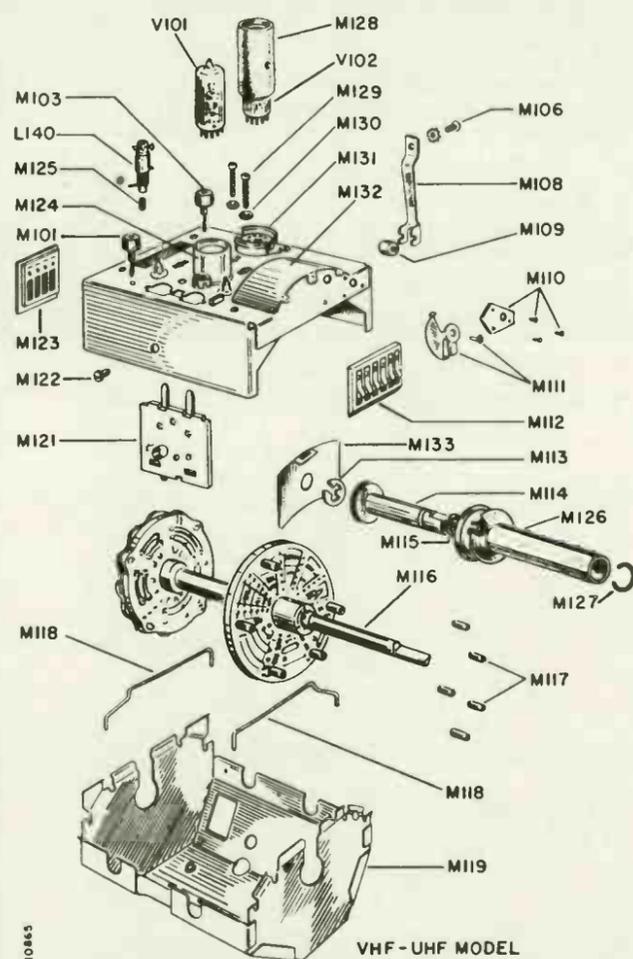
Exploded View of VHF Tuners 94E144-9, -22, -27 and -30.
